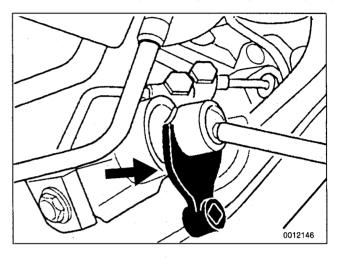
Special tool (arrow) installed on inner tie rod end.
